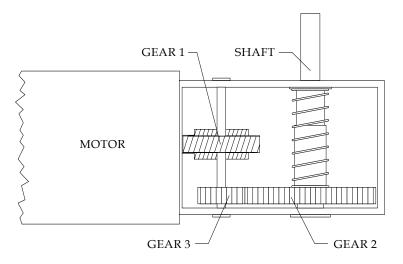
Gear Box Modified by Changing Gears 2 and 3.
